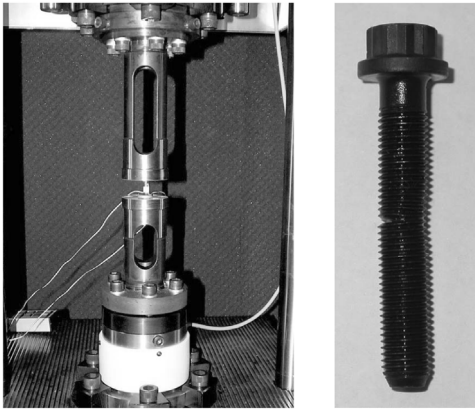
Bolt fatigue test setup and typical fatigue-fractured bolt
